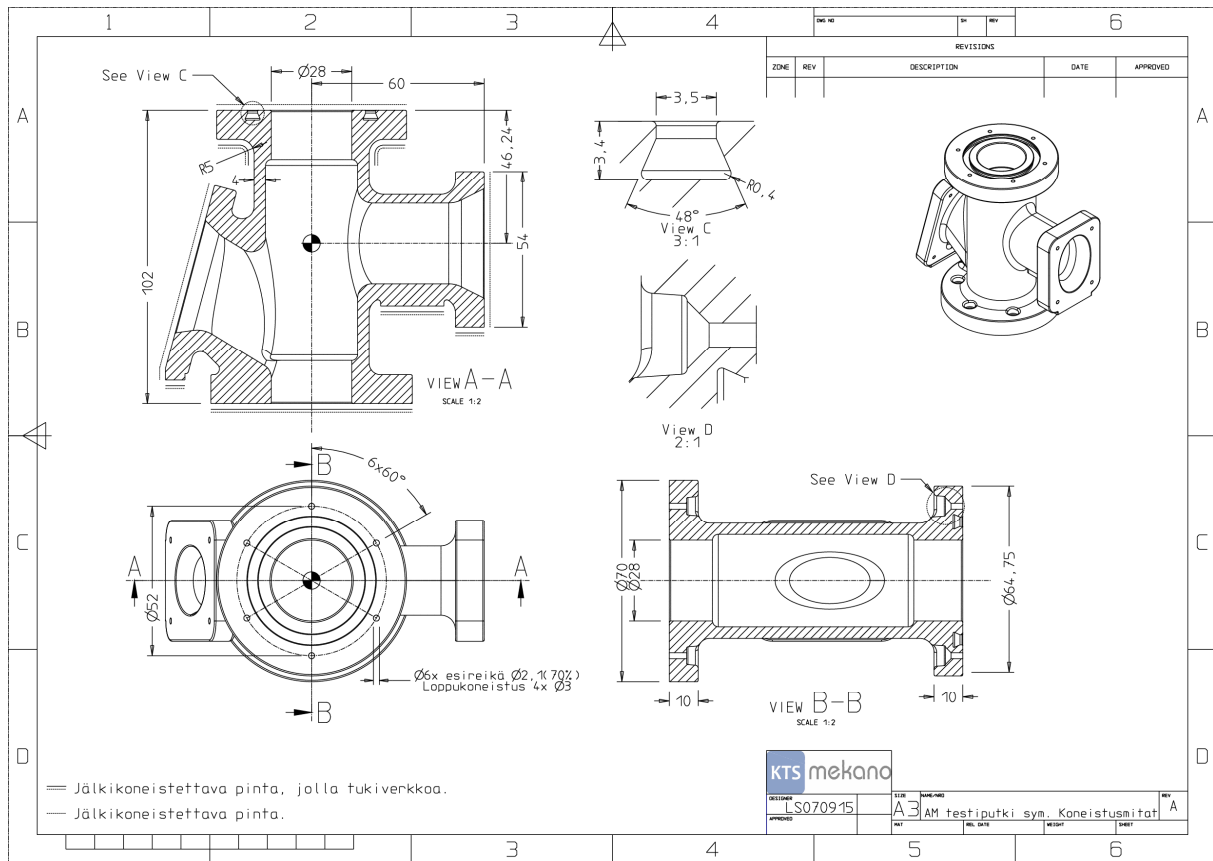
Machining of the test component. Preliminary drawing in the early design phase.
